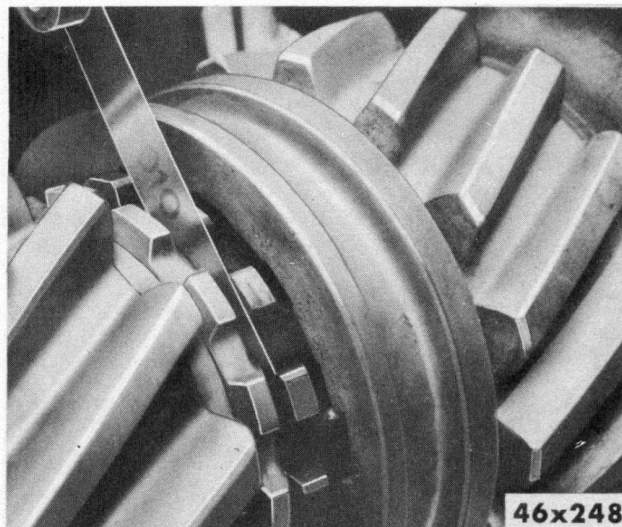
Checking Cross Shaft Spur Pinion End Play
